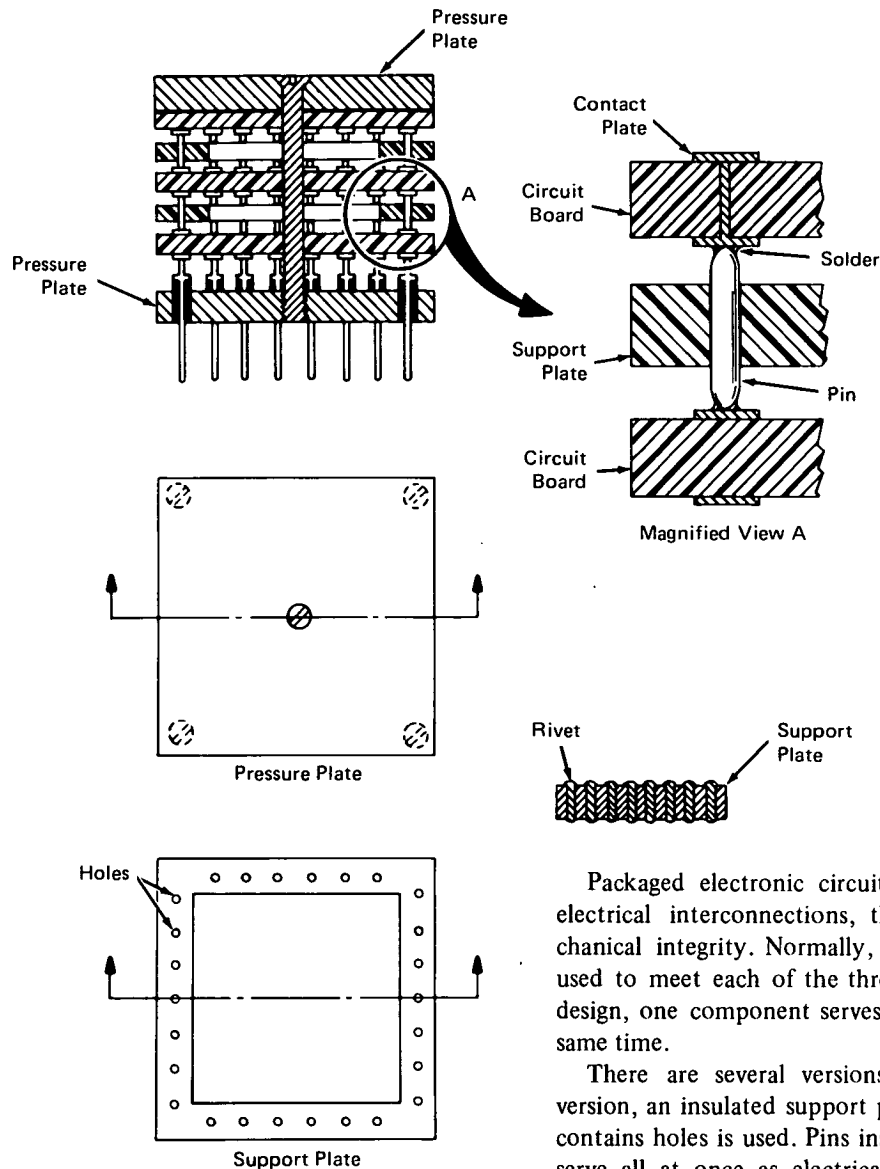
Electronic Packaging Using Pin or Rivet Contacts
